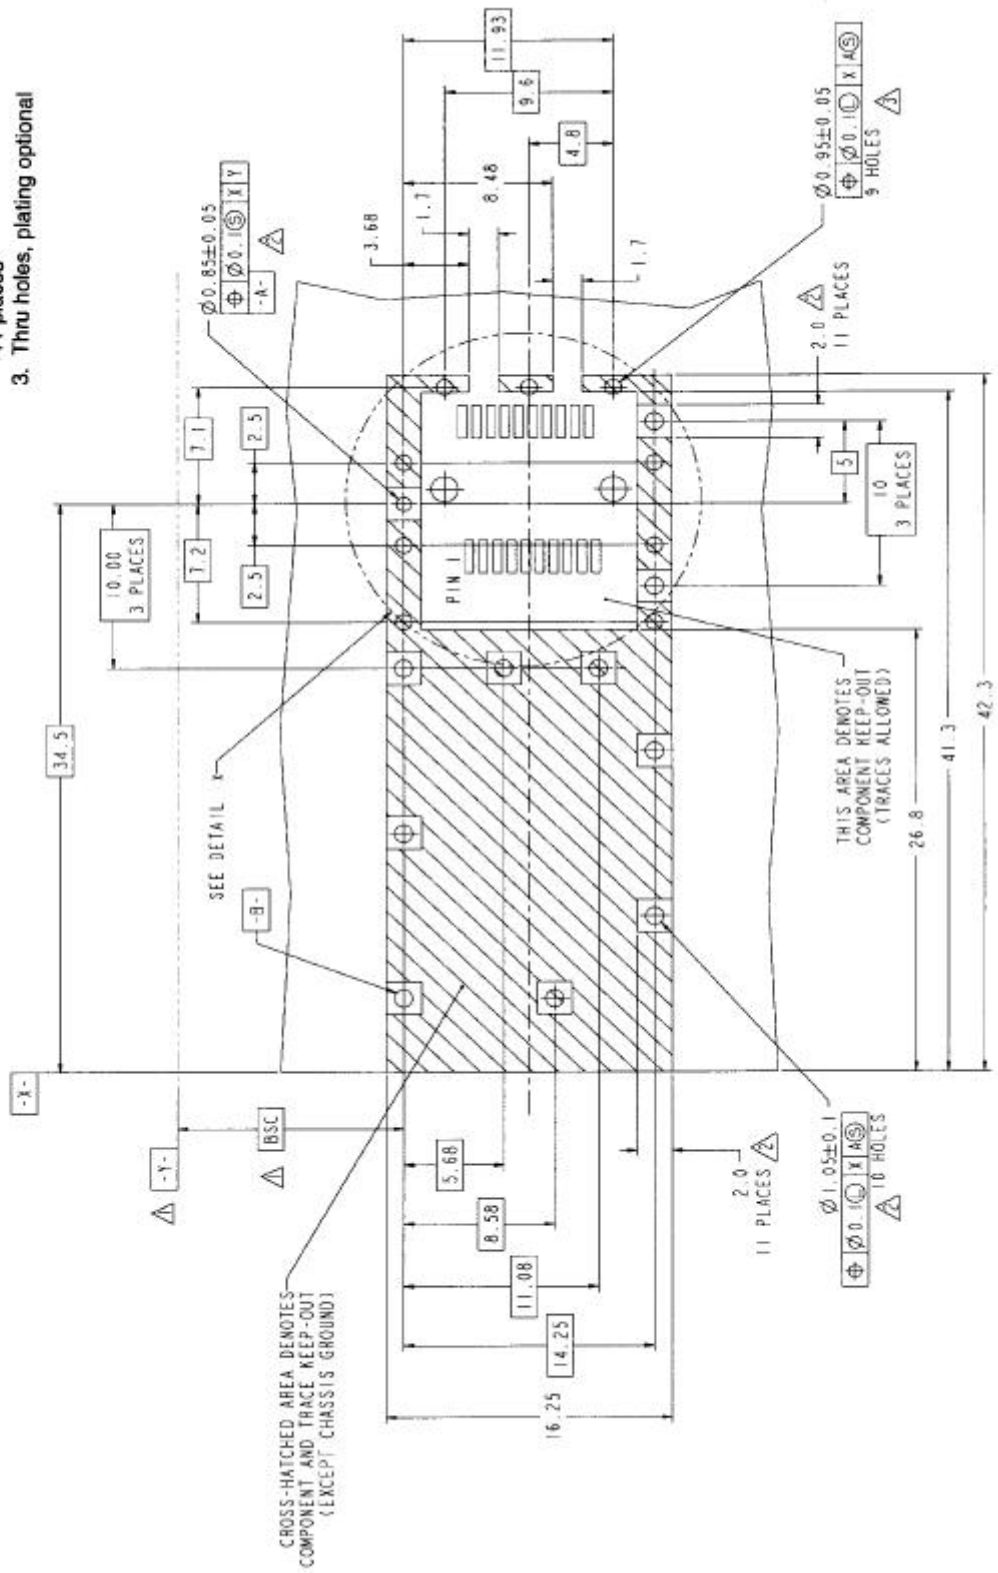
Recommended Board Layout Hole Pattern and Panel Mountin
